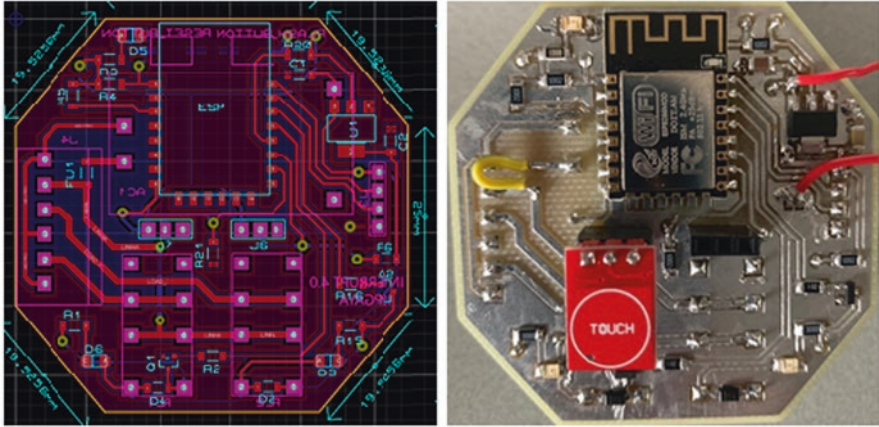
Touch sensor of switch module; view on the left side the PCB project and on the right side the final developed PCB
